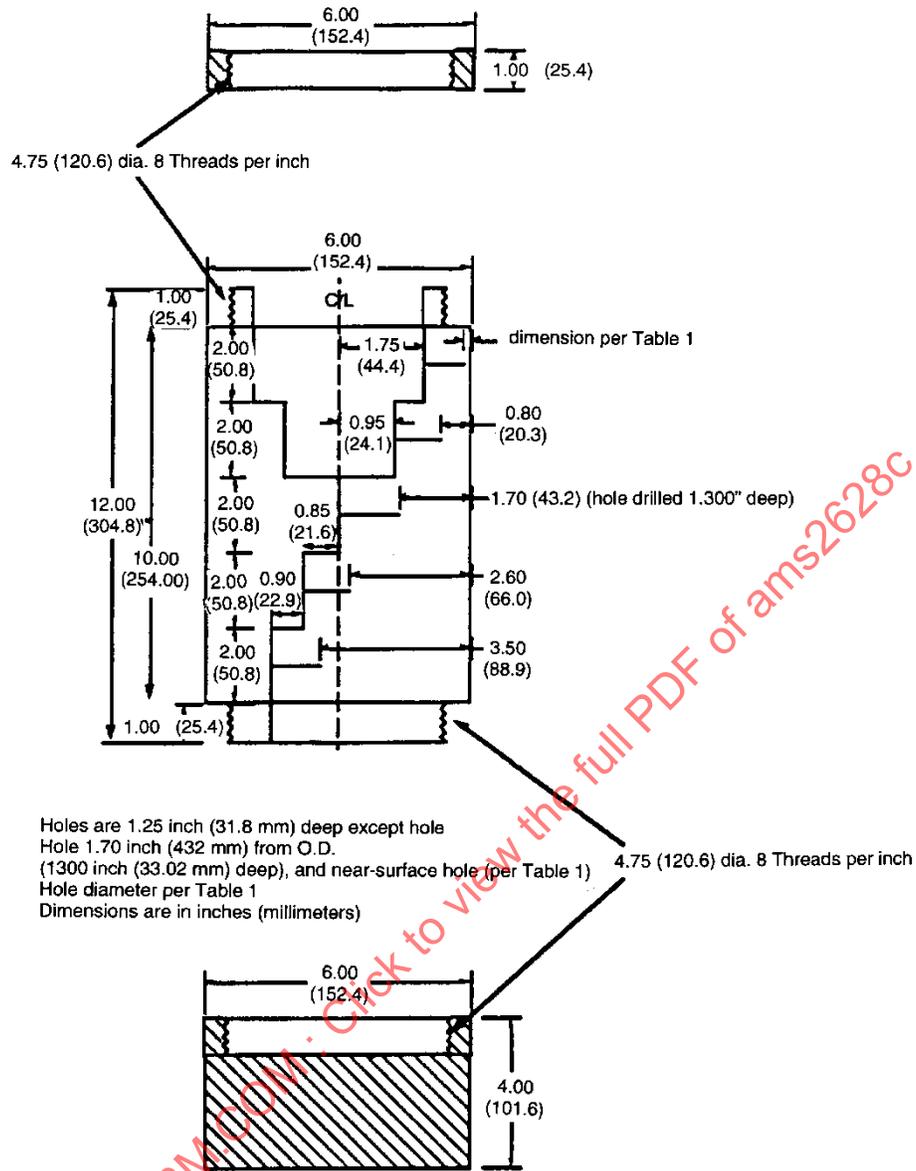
Titanium calibration standard, 6 inches (152 mm) diameter
